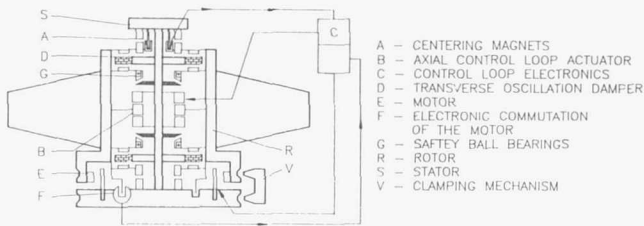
Schematic of a Single-Axis Magnetic-Bearing Momentum Wheel
